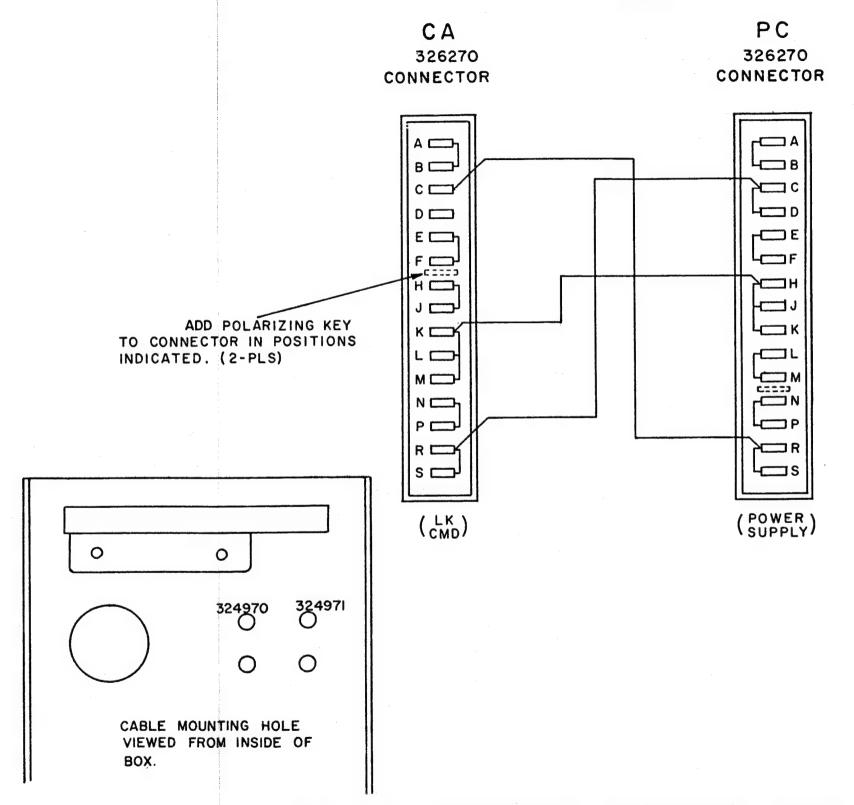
321230 Electrical Service Assembly (Clutch) Wiring Diagram (Sheet 2 of 4)
